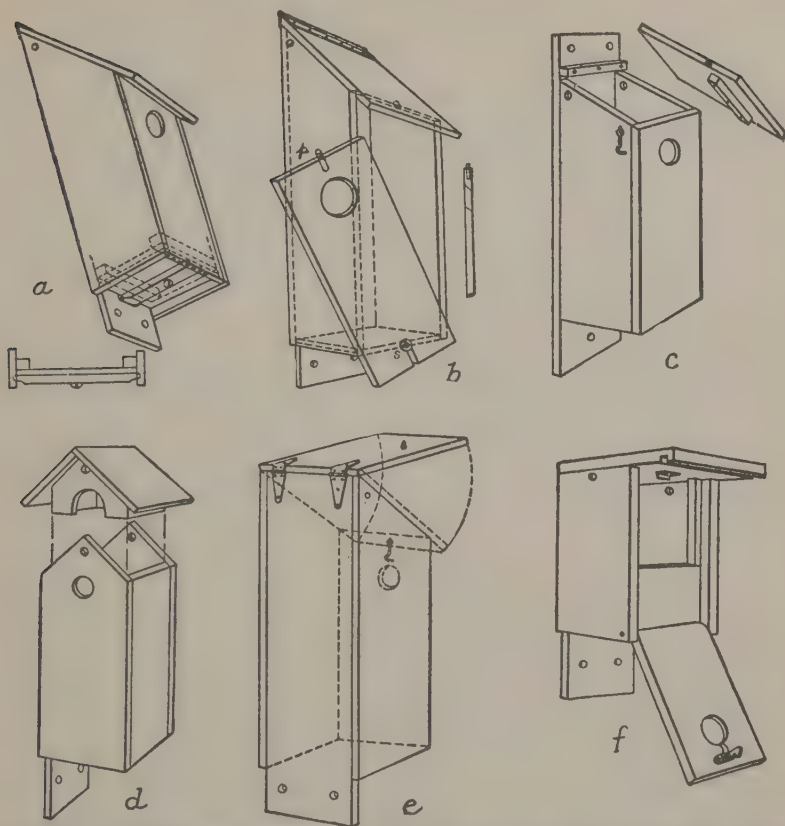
Accessible nest boxes: *a*, removable bottom, released by the slight turn of a cleat; *b*, swinging front, held in place by the pin *p* and by tightening the screw *s*; *c* and *d*, removable tops; *e*, hinged top; *f*, hinged front held up by a catch
